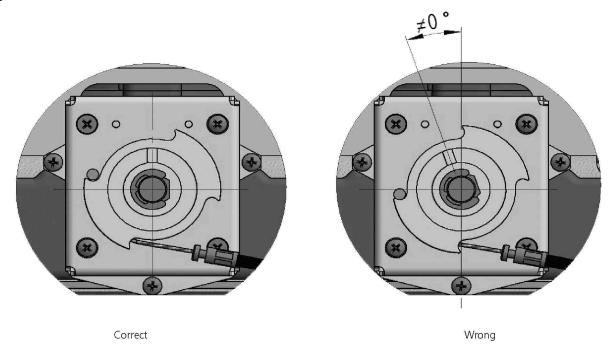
Position of interlocking shaft of the ISM with connected CBkit_Interlock_3
